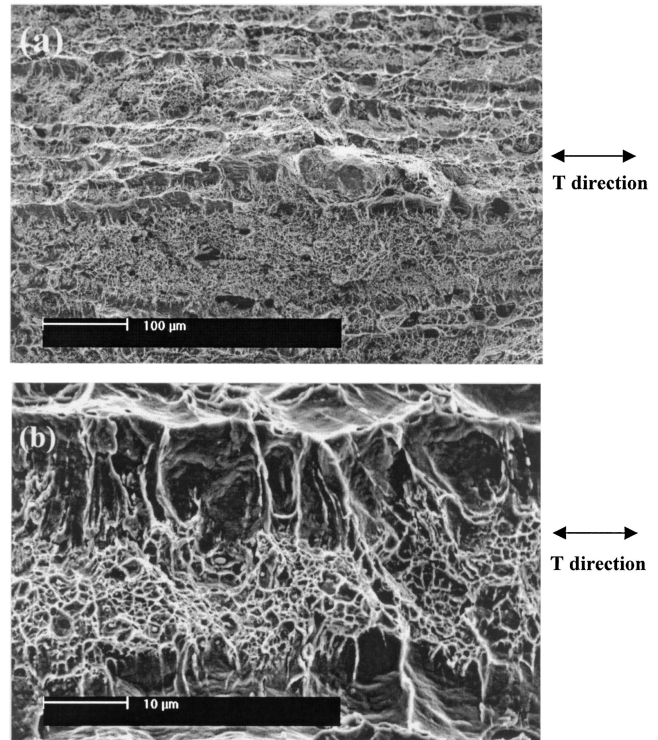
(a) and (b) Fractographs showing void-sheet failure in a slow-cooled steel specimen when the tensile axis is in the L direction of the plate. Stress triaxiality is approximately 1.3.
